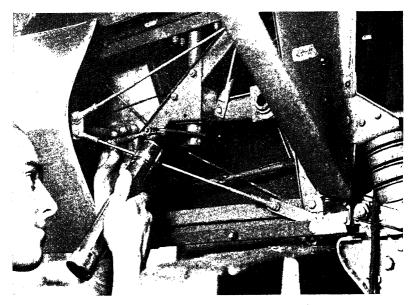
Inspect tall unit and tall wheel (3). Rudder control cables and pins being checked over.
